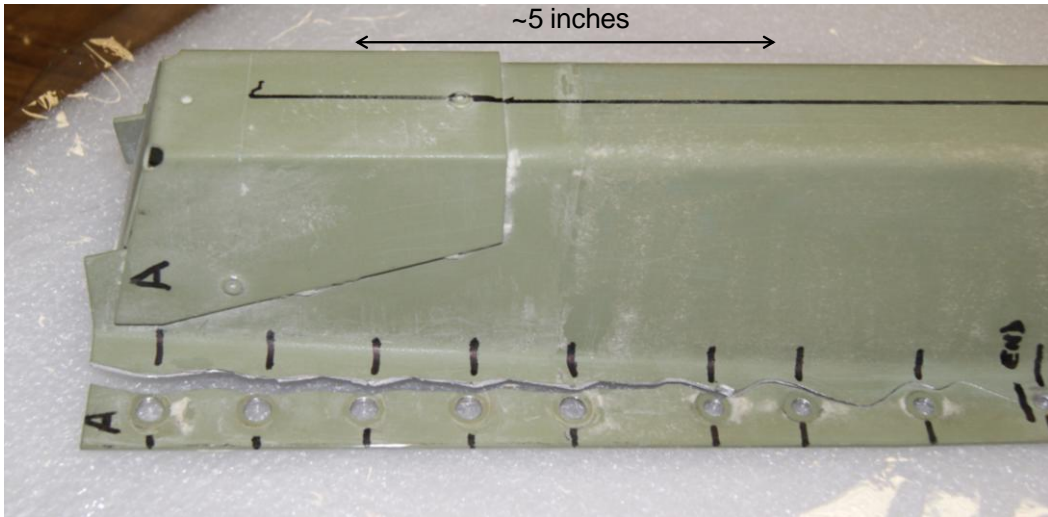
Panel 2, S7 Cracked Stringer (LO₂ flange end) after IT Removal
